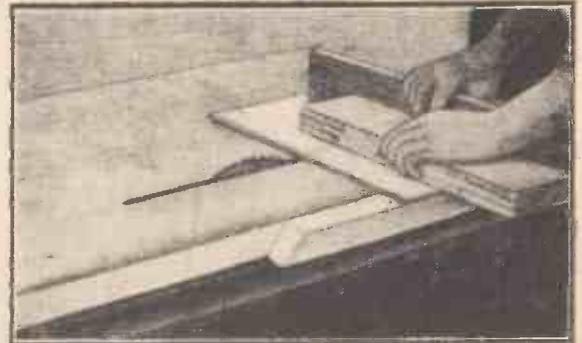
The same sliding jig being used for cutting the shoulders on tenoned work.
